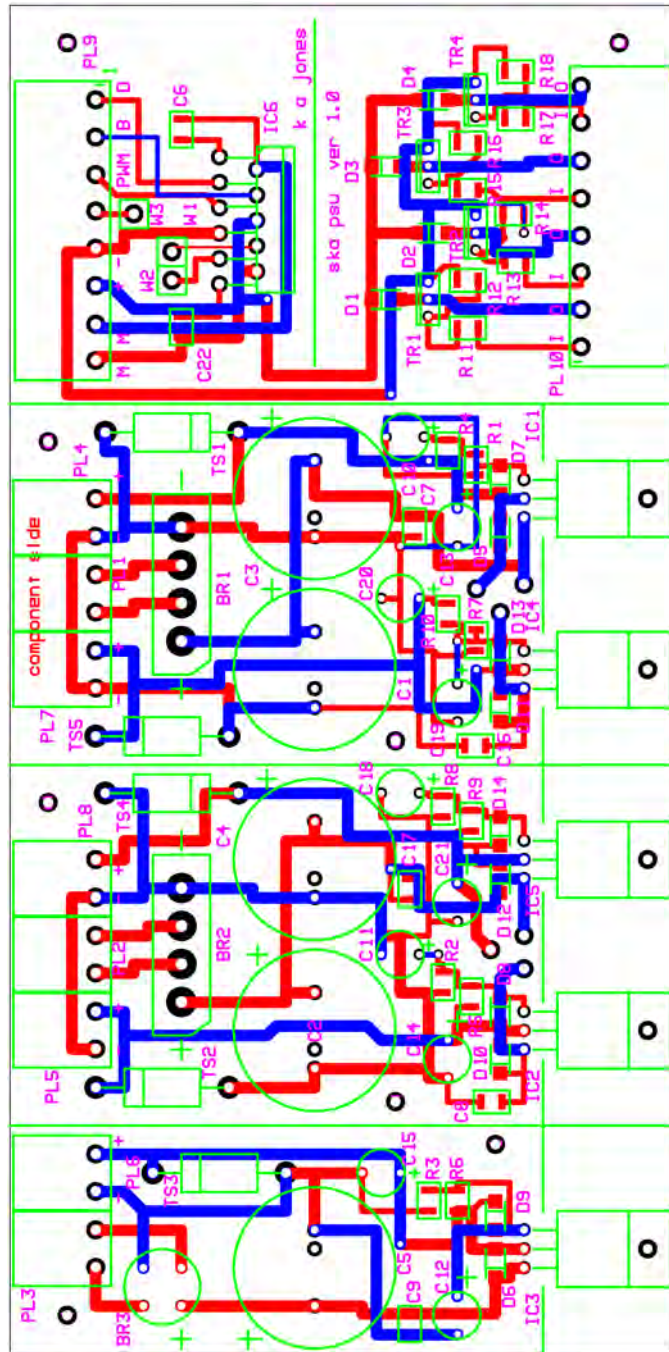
Power Supply Unit Printed Circuit Board (PCB) layout. The Power Supply Unit PCB was housed in the Electronics Control Box.
